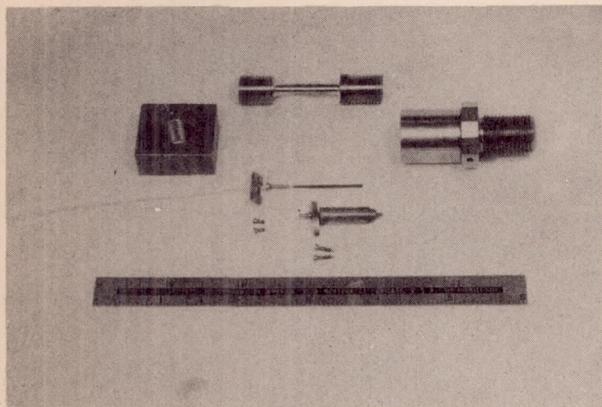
Specimen, dynamometer, extensometer, tup (details).
